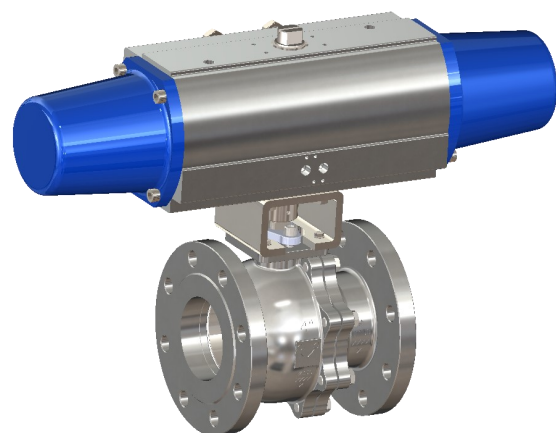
Series 41 Ball Valve mounted with series 3800 pneumatic cylinder actuator
